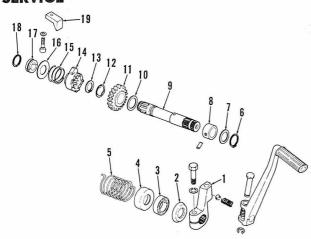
Exploded view of the kick starter assembly. Gear (11) meshes with first gear (19 -Fig. Y8-22).
